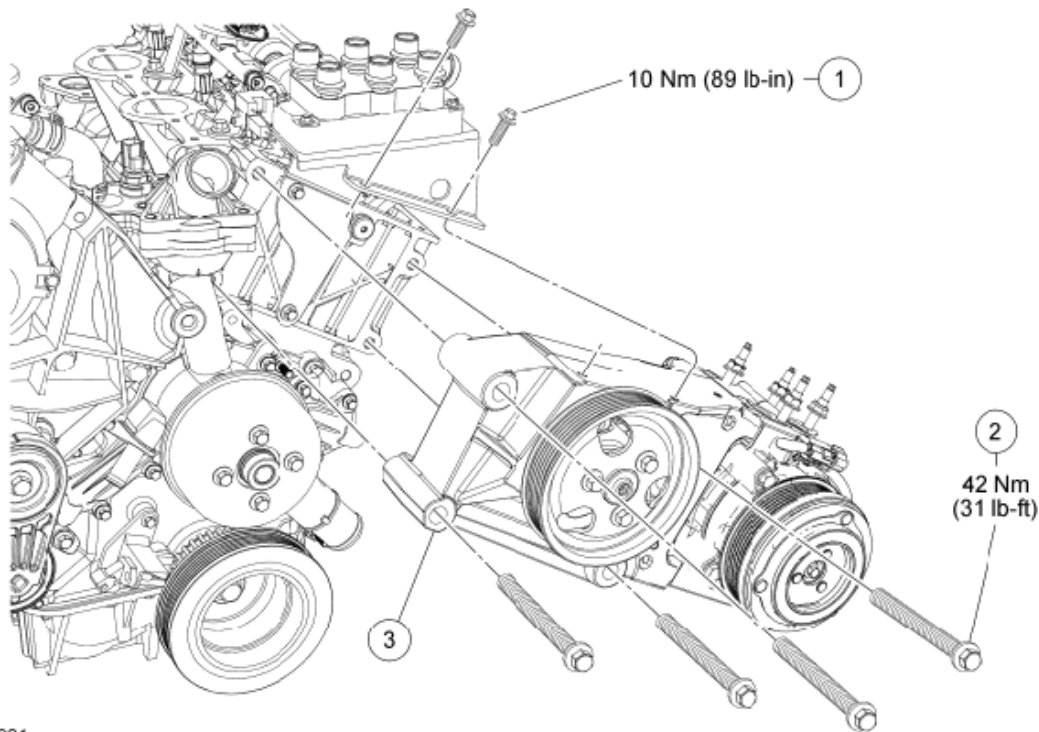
Identifying A/C Compressor And Power Steering Pump Bracket With Torque Specifications
